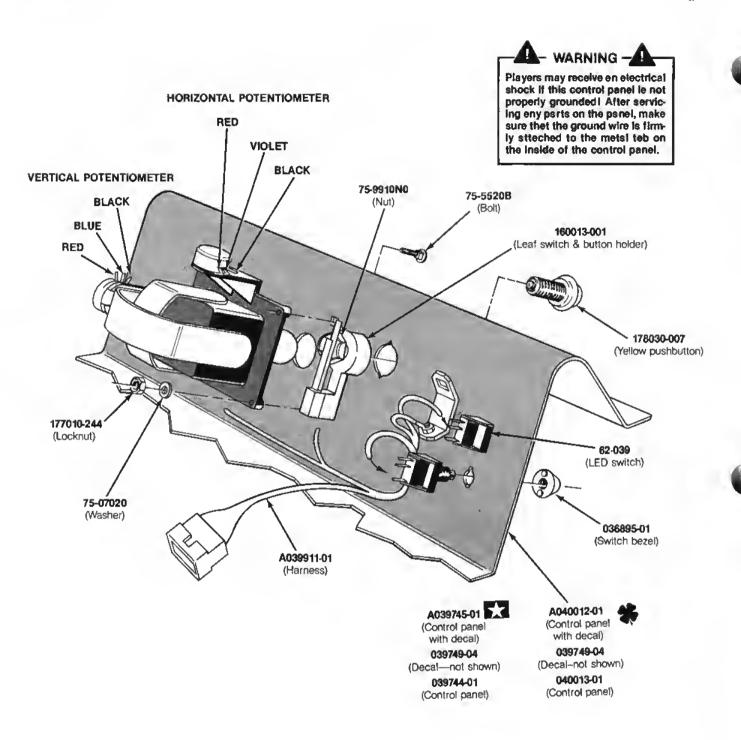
Control Panel Assembly US-Built Game A039746-01 A Ireland-Built Game A040011-01 A
